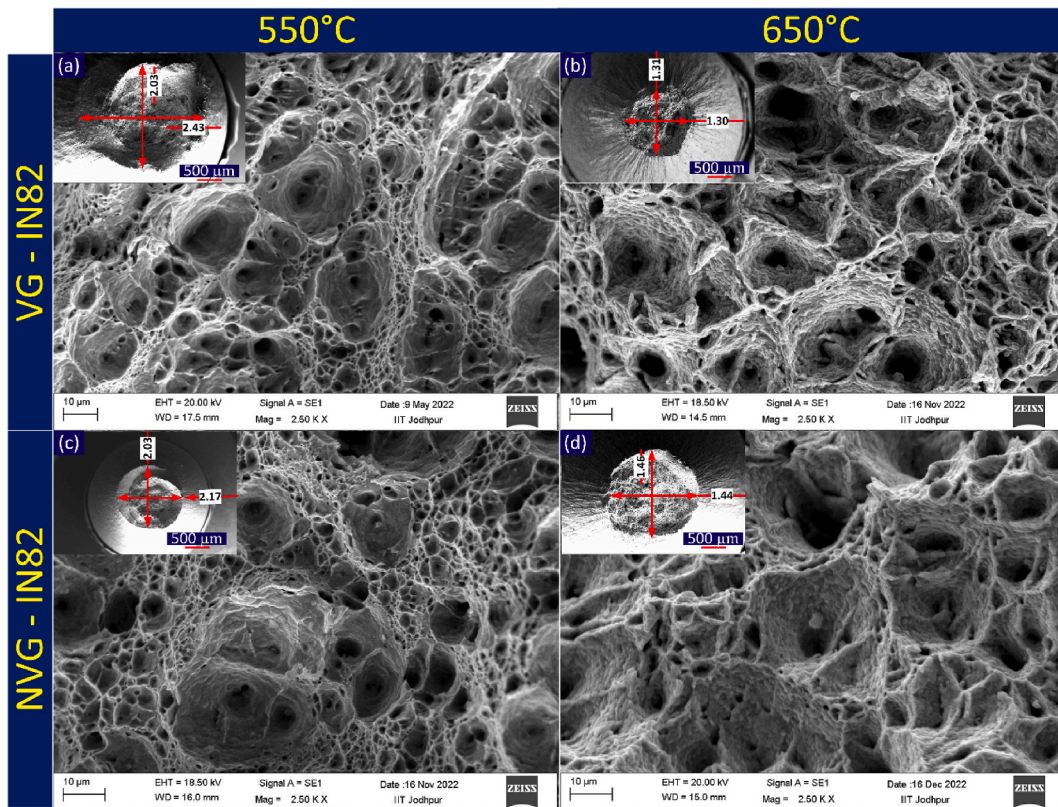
A top and detailed view of the fracture surface (a) VG-HT1, (b) VG-HT2, (c) NVG-HT1, (d) NVG-HT2.
